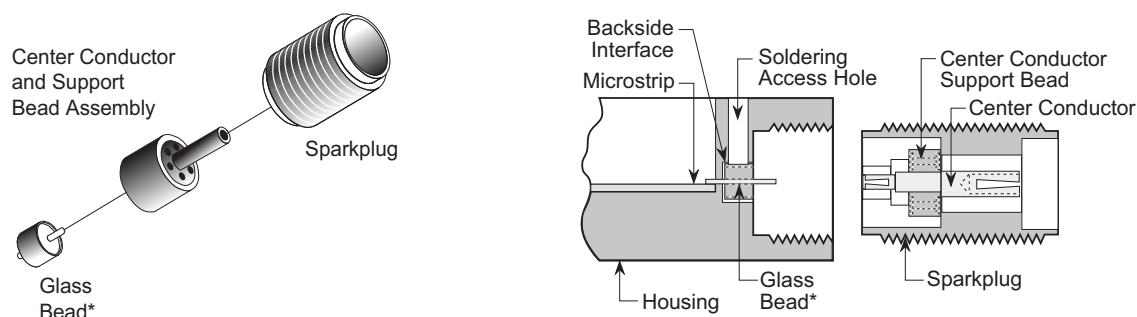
K102F-R or EK102F-R Assembly (*Glass Bead not supplied)
